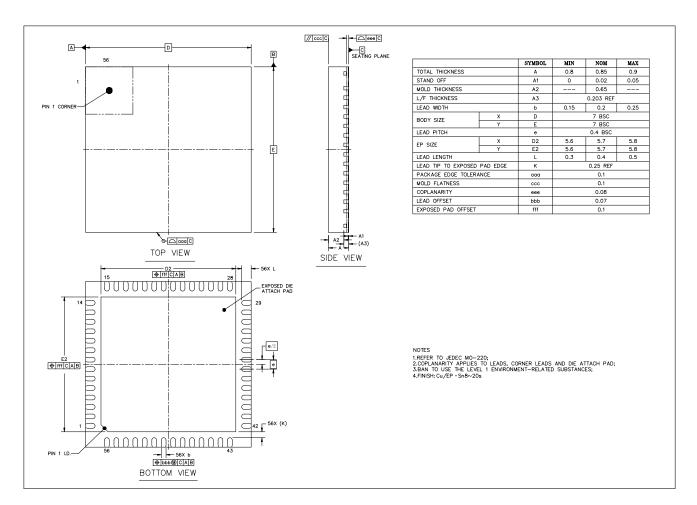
QFNWB (7×7 mm) Package for ESP32-S3FH4R2
